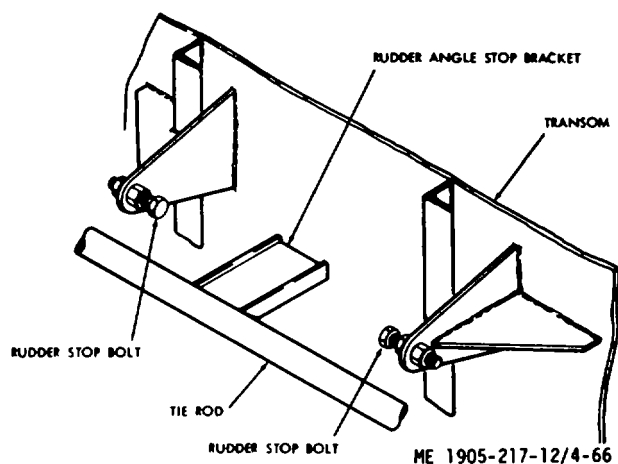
Rudder stops installation, hull numbers 8540 thru 8560 and 8580 thru 8818.
